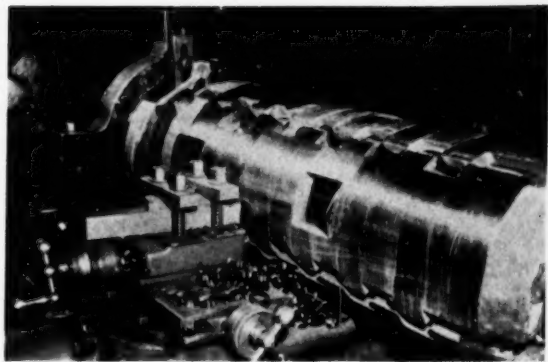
CARBIDE CUTTING TOOL WITH MECHANICALLY CLAMPED INSERT
